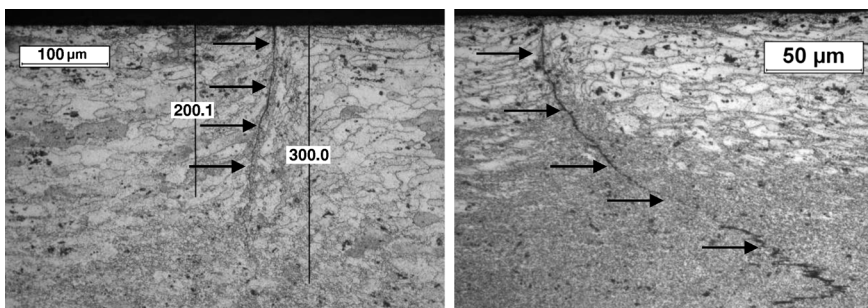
Transversal weld bead macrograph with typical root defects on butt joint
